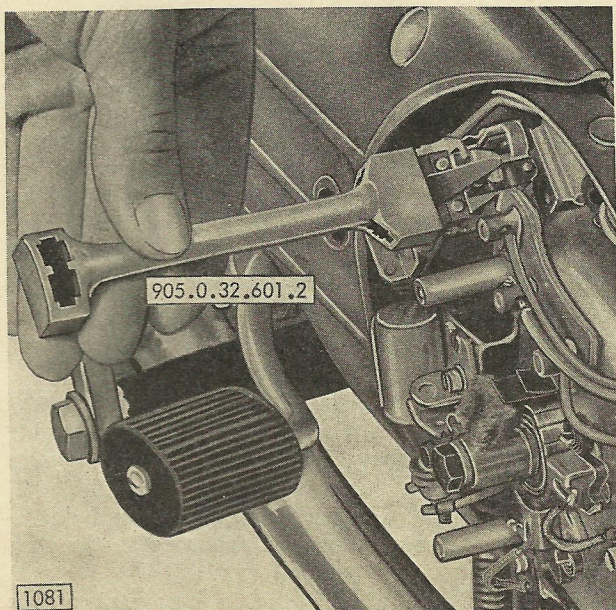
Adjusting of the voltage regulator with adjusting tool Pos. 905.0.32.601.2
